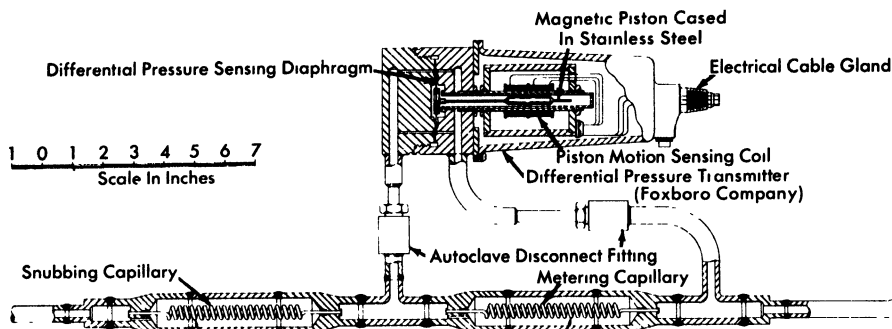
Capillary flowmeter, used to meter small gas or liquid streams, shown with high-pressure seal-welded differential-pressure transmitter.
